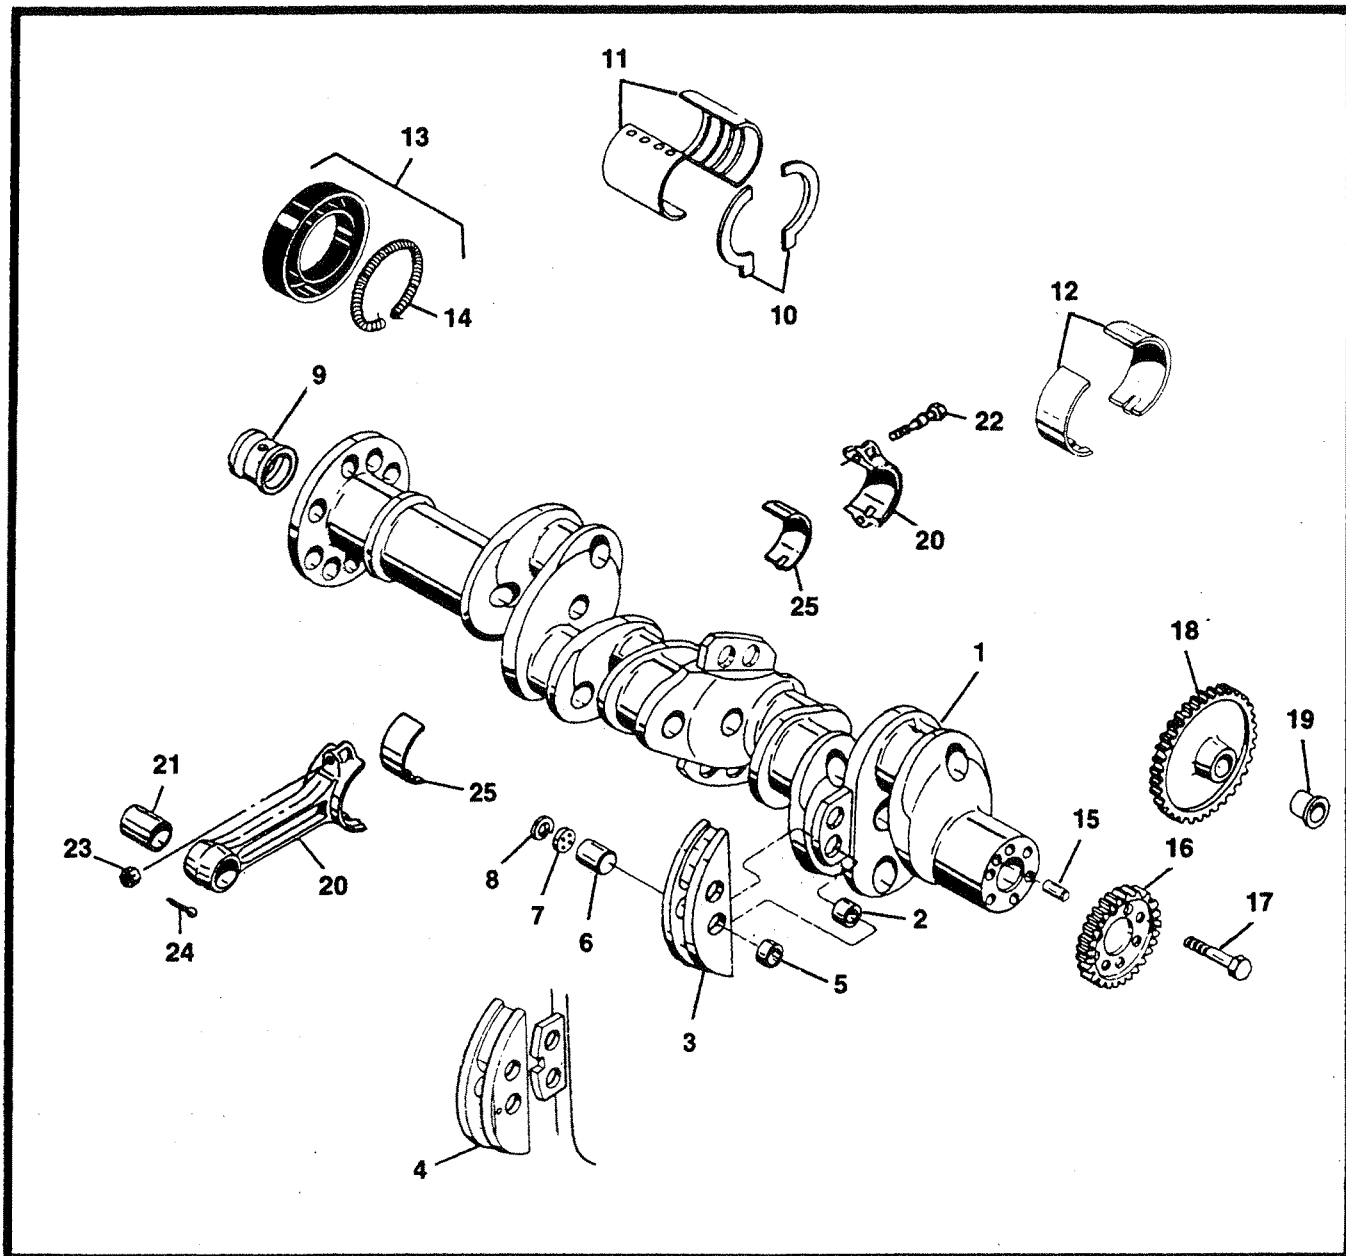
CRANKSHAFT ASSEMBLY.
